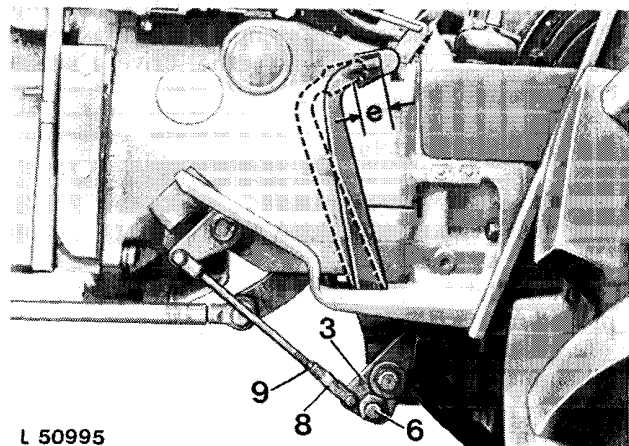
Adjusting Clutch Pedal, Pedal Arm and Free Travel on Tractors Equipped with Dual-Stage Clutch
